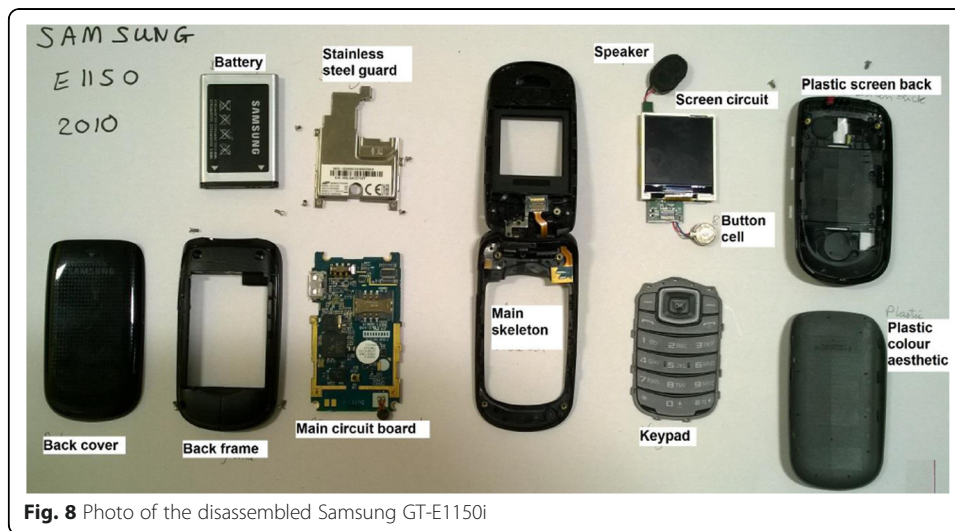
Photo of the disassembled Samsung GT-E1150i
